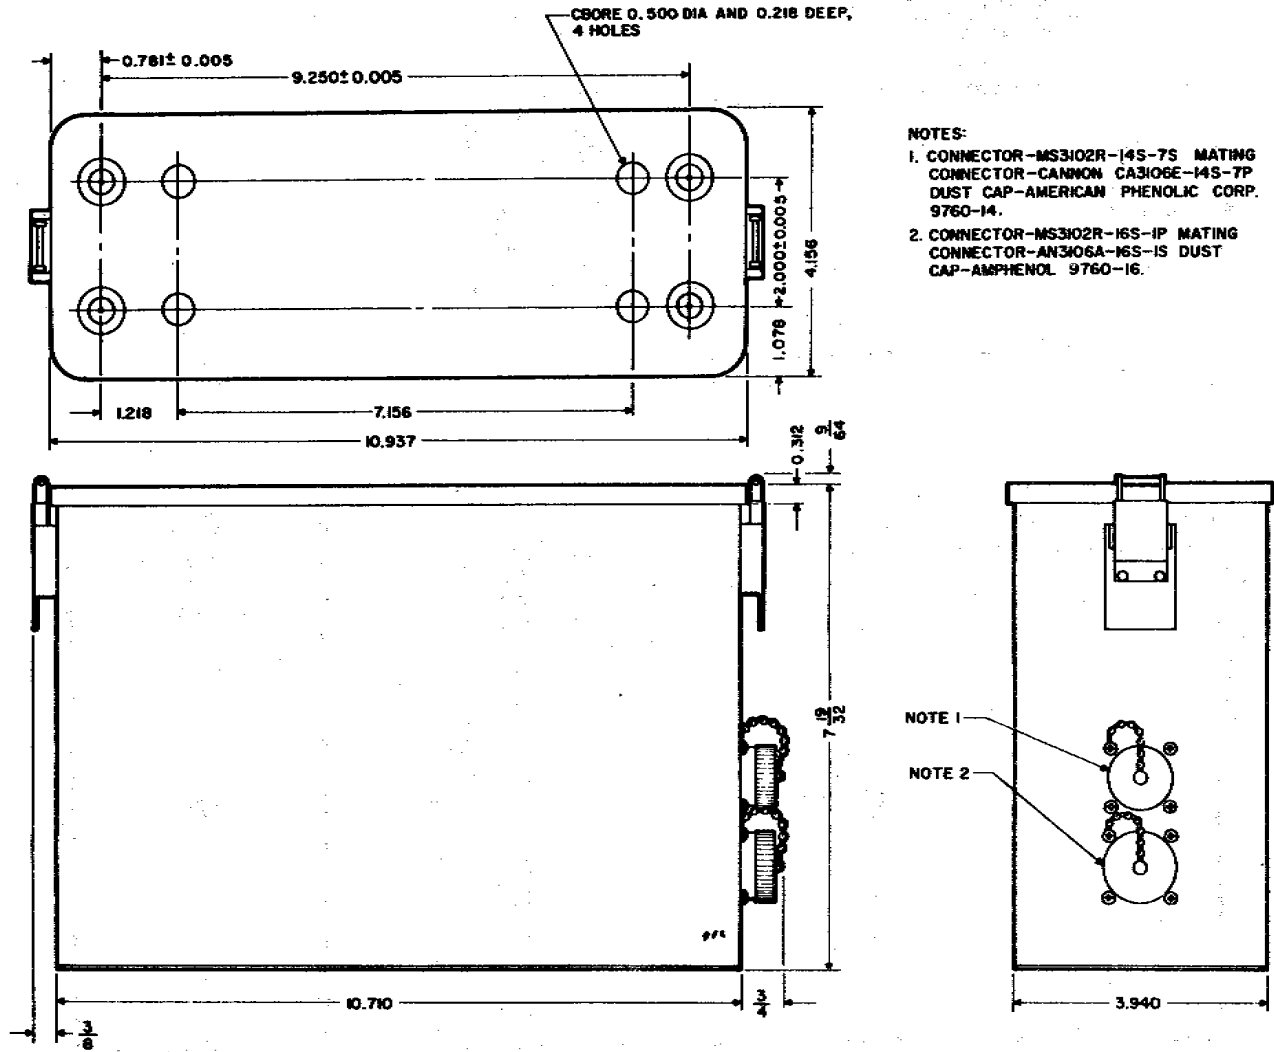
Power Supply PP-3700/PRC-41, Outline and Mounting Dimensions
